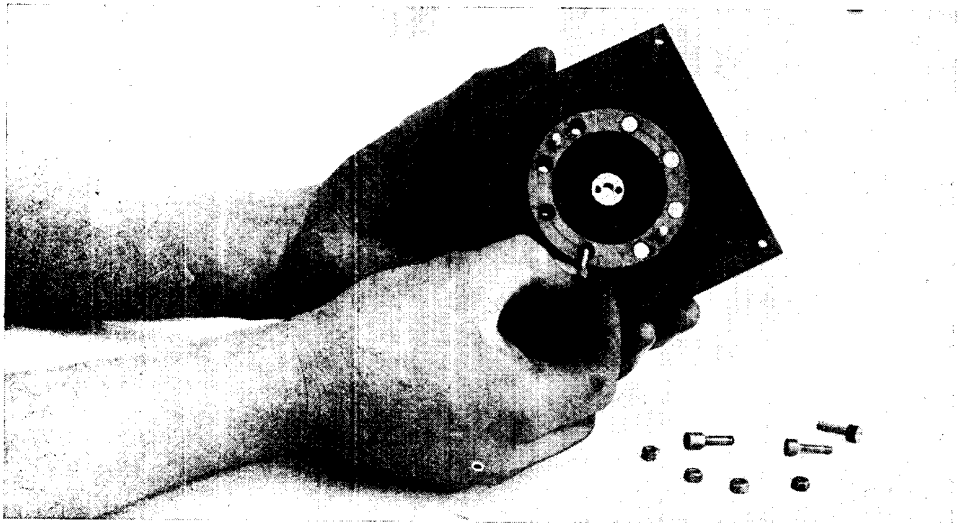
Here is shown in close detail the assembly of the contact studs, the faces of which come flush with the top side of the ring
